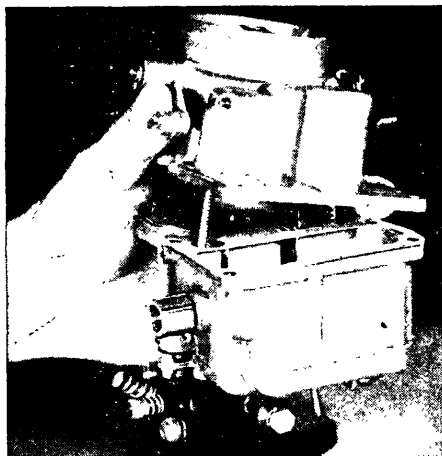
Remove choke fast idle rod, cover screws and air horn
